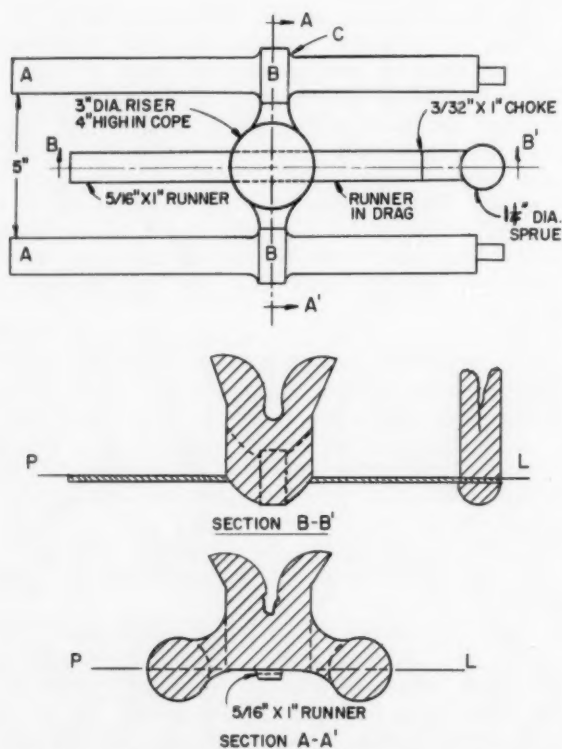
Rigg'ing for 6 in. valve stem casting (heat 124).
